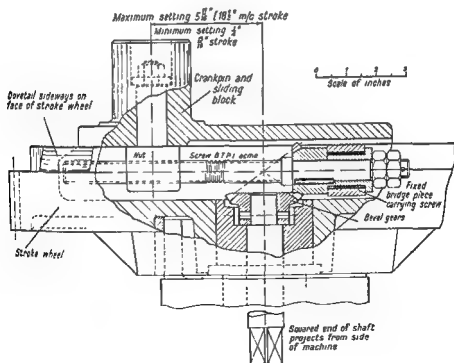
Details of Mechanism for adjusting Position of Crank Pin Block on Stroke Wheel.
